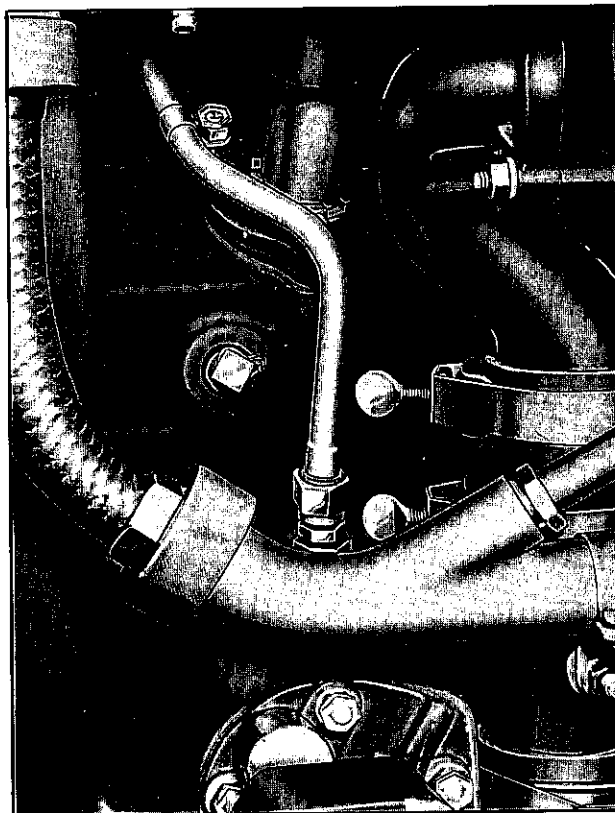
Source of Engine Oil Pressure Supply for Type I and Type II Installations on Right Side of Engine.
